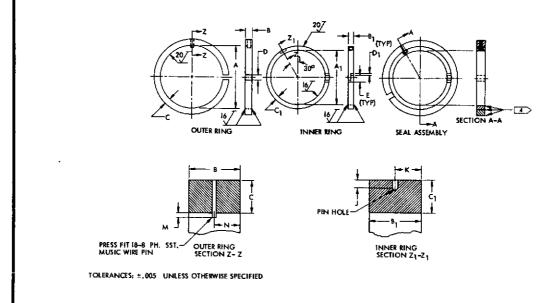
SECOND STAGE ROD SEAL ASSEMBLY, 6.35-CM (2.5-IN.) K-SECTION
